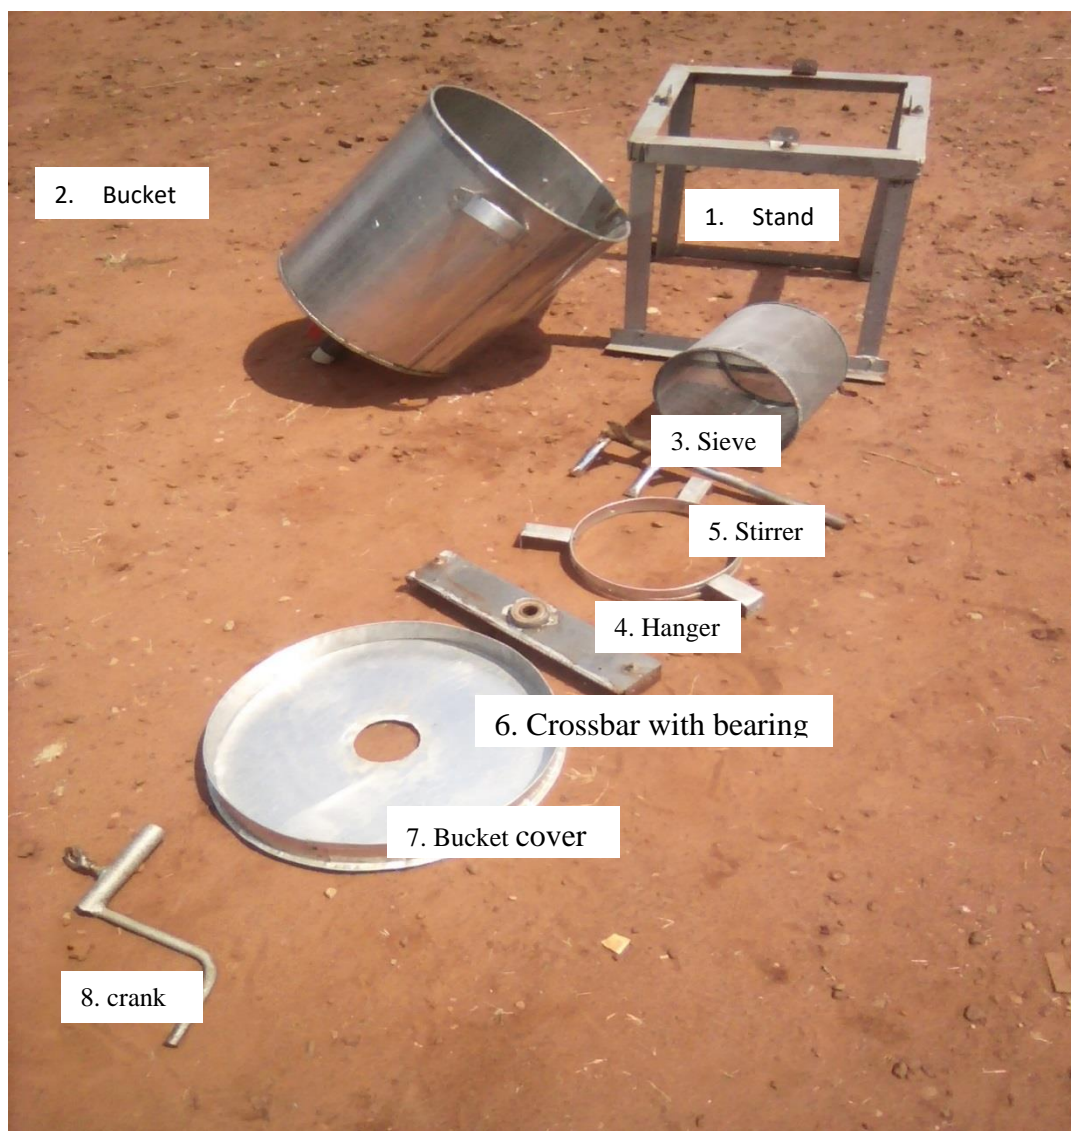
Exploded view of the wet sieve equipment (numbered according to installation order)
